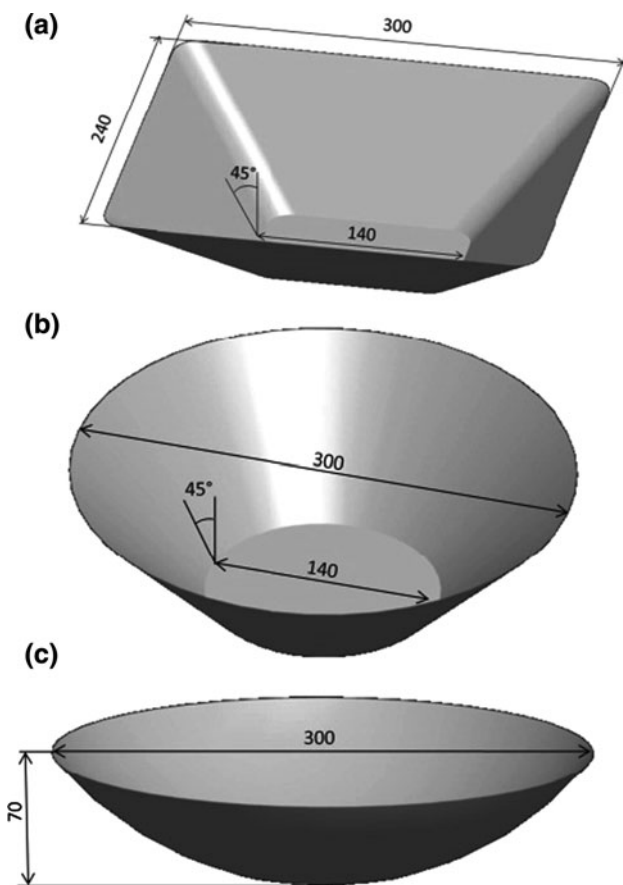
Sample parts: box, cone and dome; dimensions in mm
